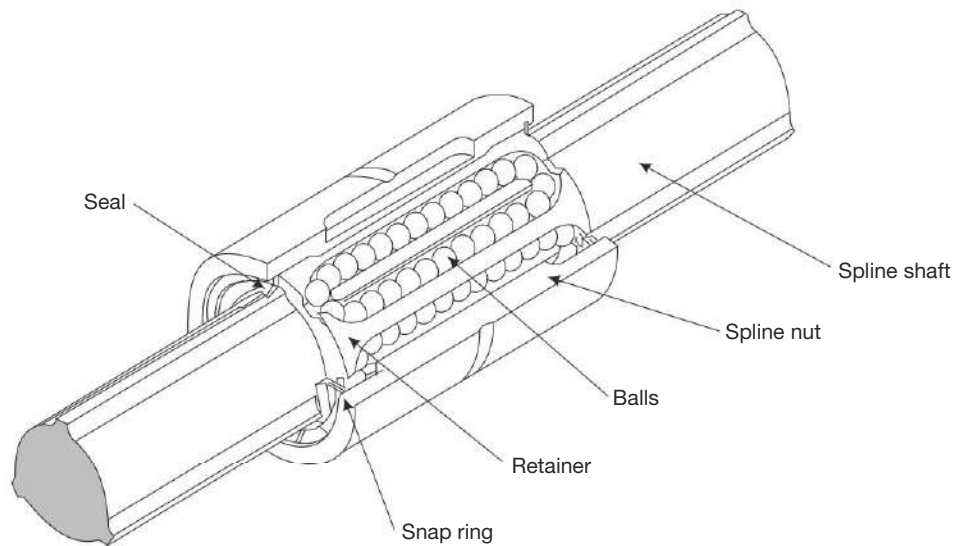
Ball bush used for linear movement in CNC machine tools (Courtesy, THK Co. Ltd., Japan)
